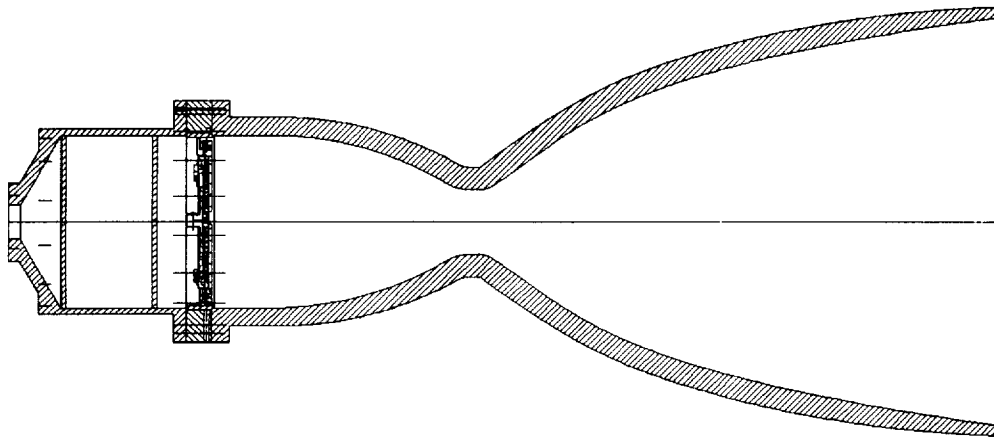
USFE Thrust Chamber Assembly. TCA consists of oxidizer dome, catalyst bed assembly, fuel injector, and ablative chamber/nozzle. Chamber inner diameter is 10 in, throat diameter is 3.74 in, and nozzle exit diameter is 23.7 in.
